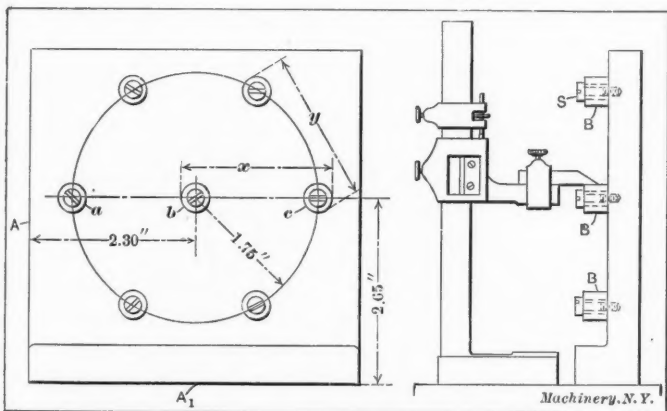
Jig-plate with Buttons attached, ready for Boring
